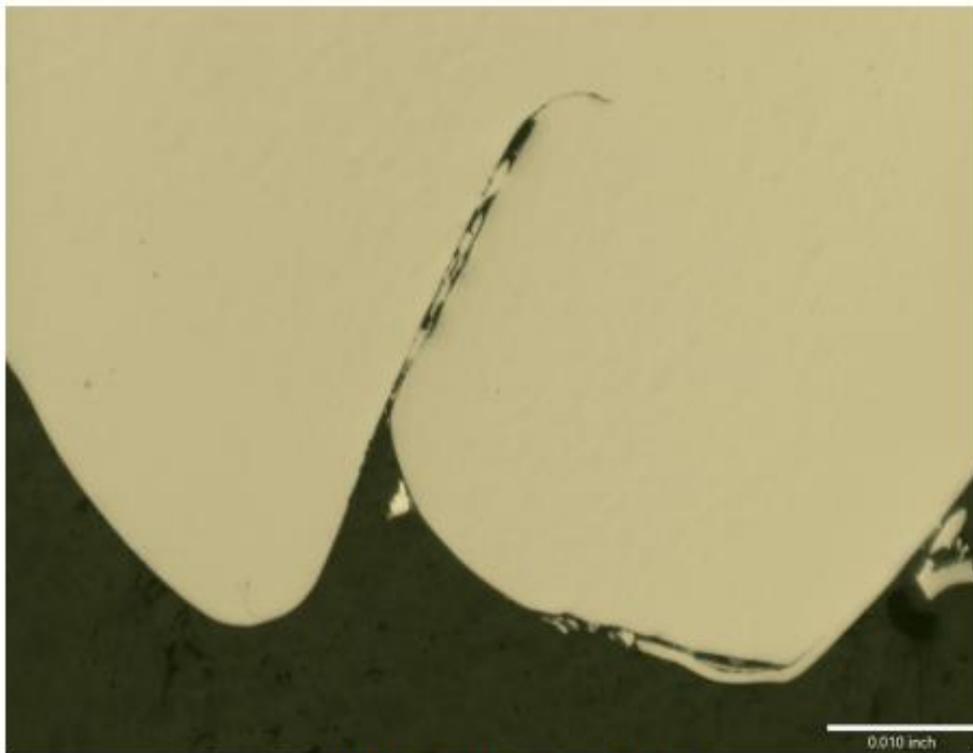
Fractured bolt cross-section last thread is severely deformed.
